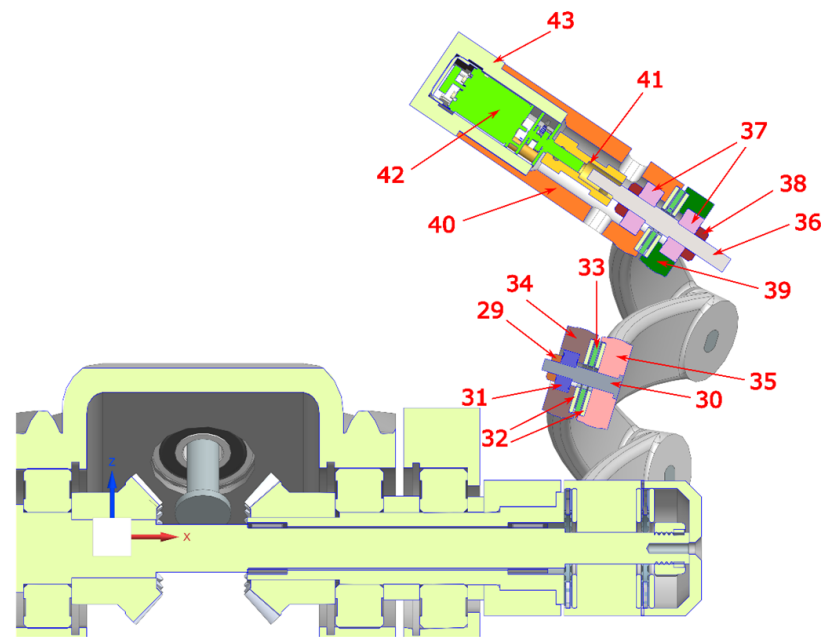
Sectioned view of the spherical mechanism's active and passive joints. The figure shows the passive joint shaft, radial bearings, axial needle roller elements, end-effector active joint shaft, q_3 actuator, rigid coupler and instrument attachment interface.
